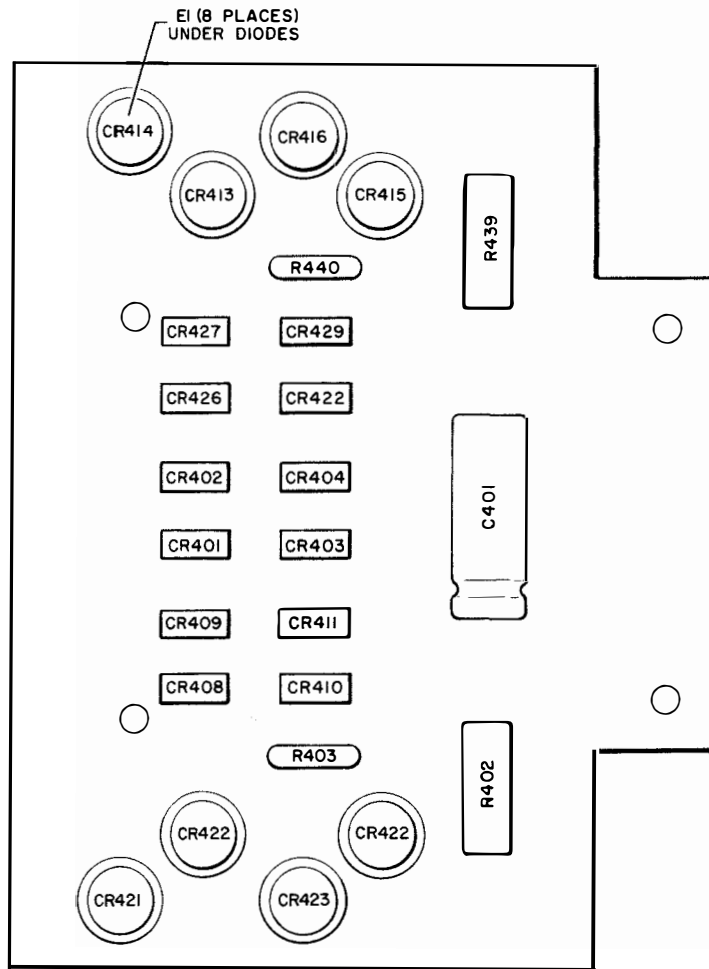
Low Voltage Rectifier Circuit Board A1A6, Location of Parts
